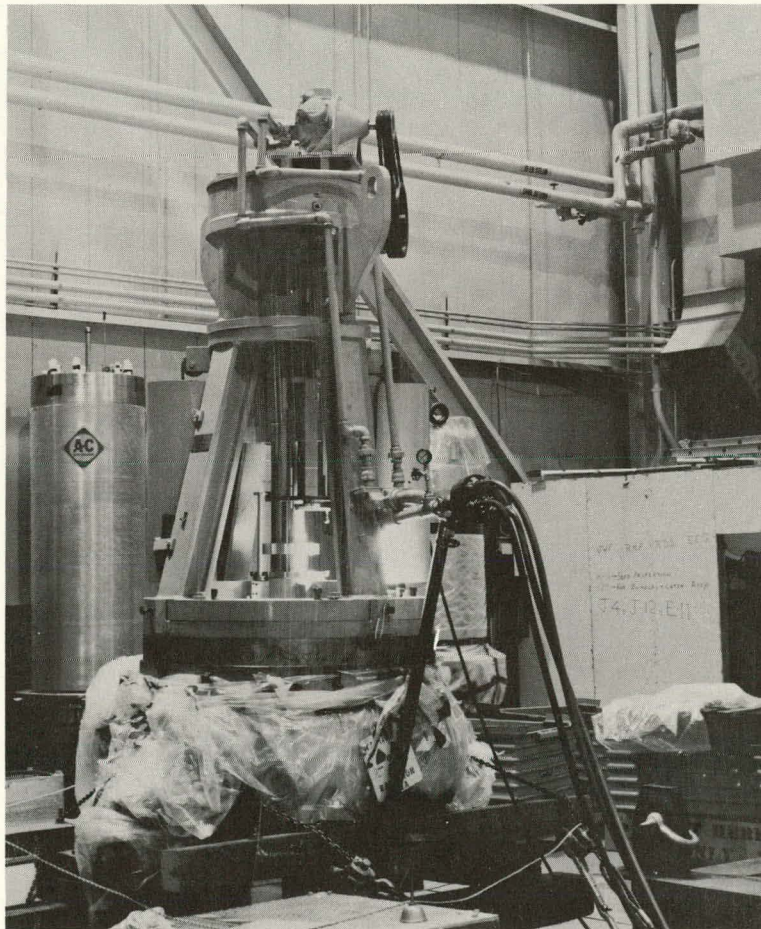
Portable Boring Machine Mounted on the Pump Volute.
